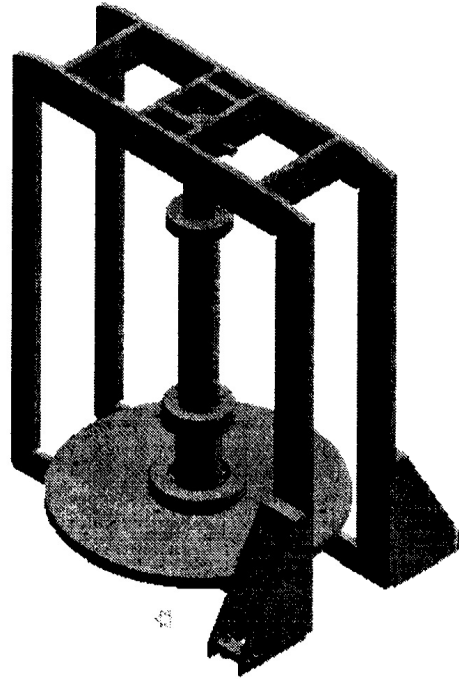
Frame of the 5.4-inch Diameter Mold Rotary Press
